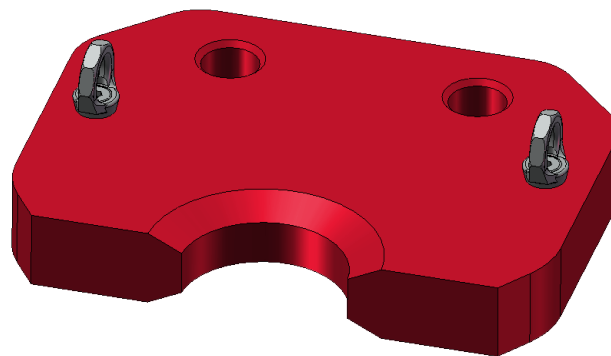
Screw in PS 1250 BGA guide plate eye bolts
